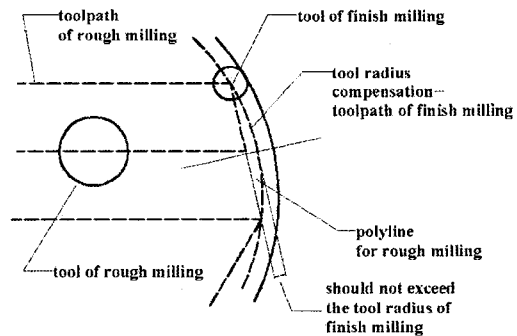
Tool paths of rough milling and finish milling of the curved boundary feature
